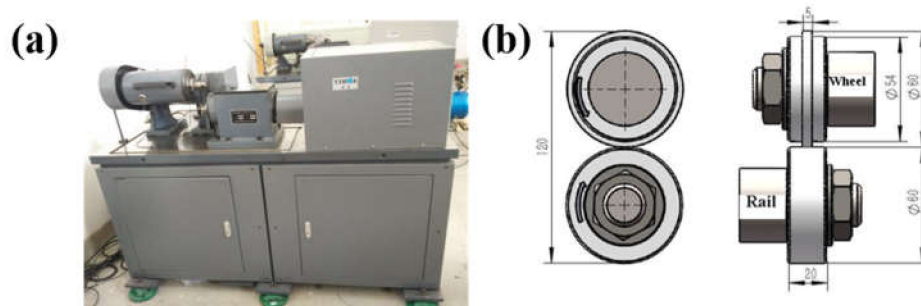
The test apparatus. (a) GPM-30 wear tester. (b) Sample dimensions and contact mode of wheel and rail samples (unit: mm).
